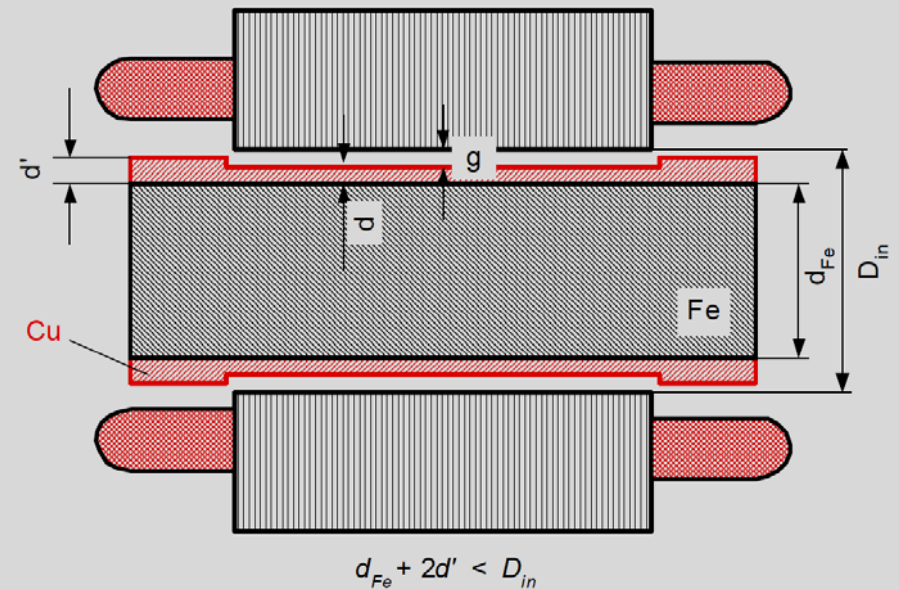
Solid rotor coated with copper layer for high speed induction machines according to U.S. Patent 5473211 [14].
